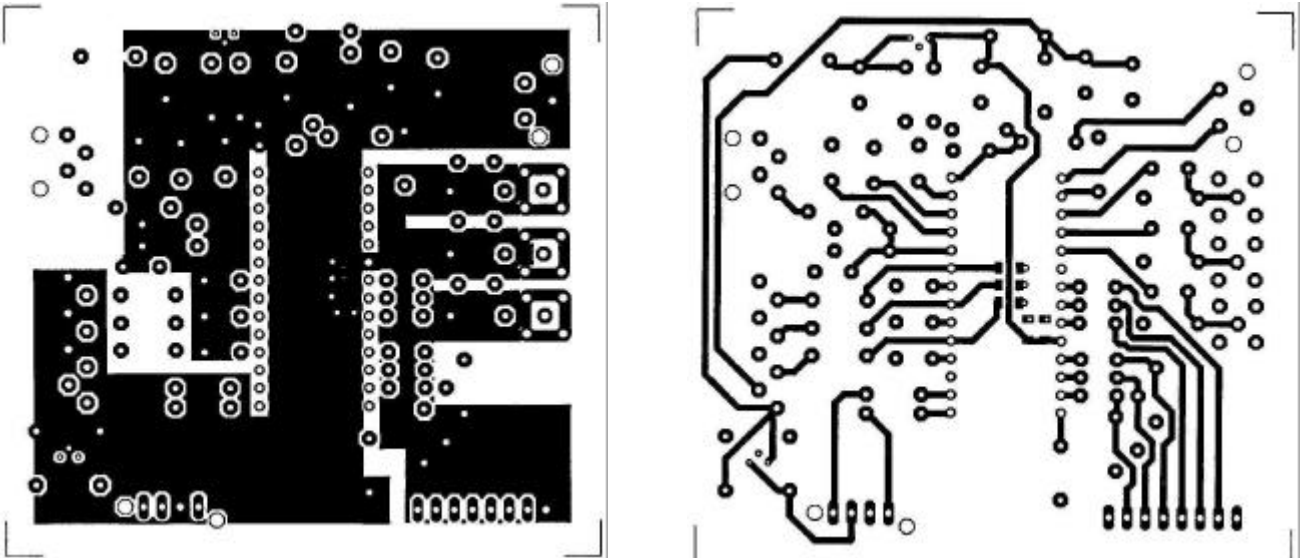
PCB layout & Components view of the TDA4780 add-on board
